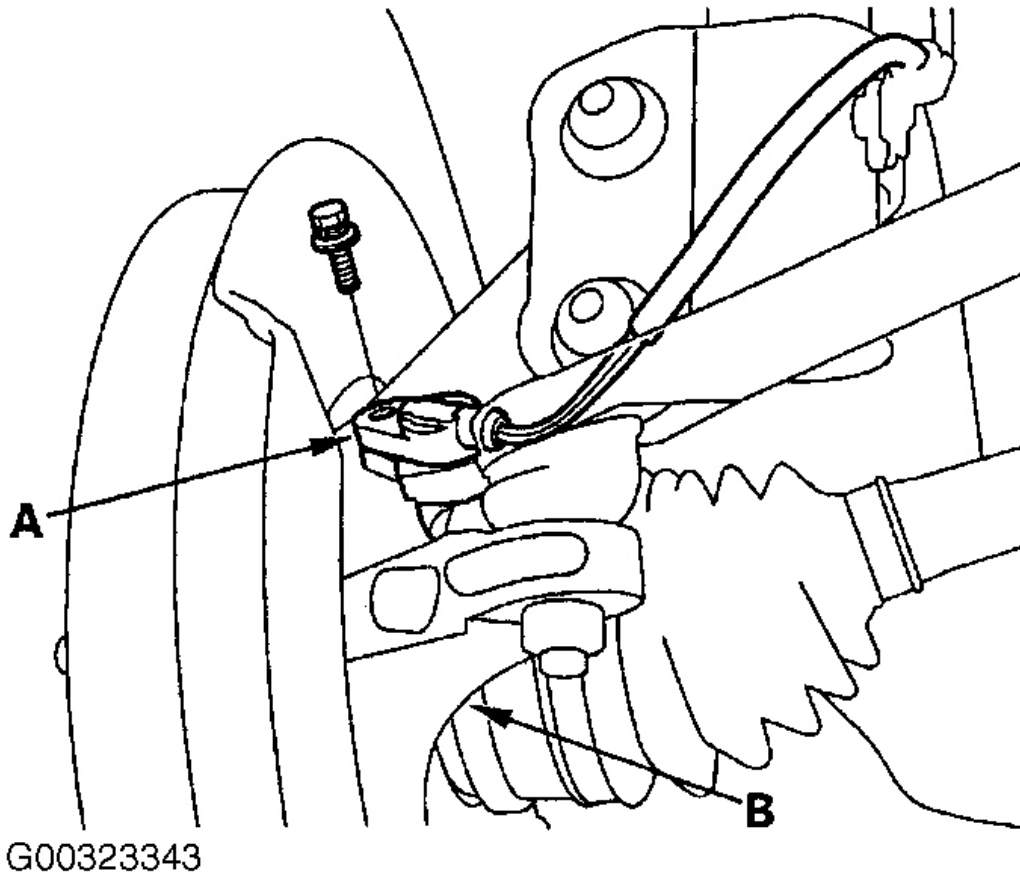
Exploded View Of Knuckle/Hub Assembly
